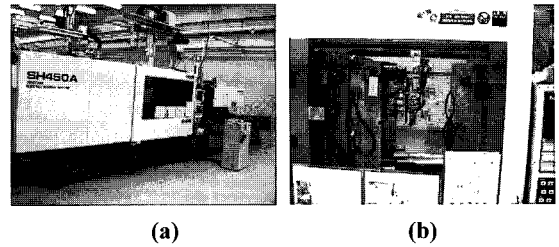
(a) Injection molding machine SH450A, (b) injection mold (7", 1-cavity)
